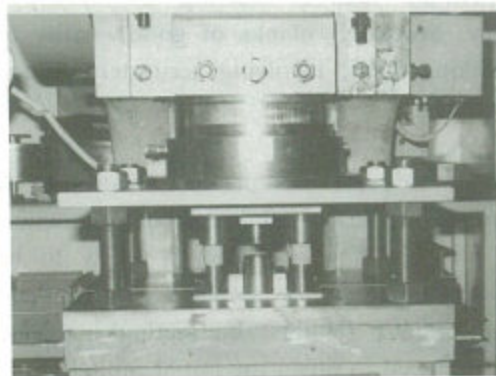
A photograph of the accelerator and the die set on a mechanical press
